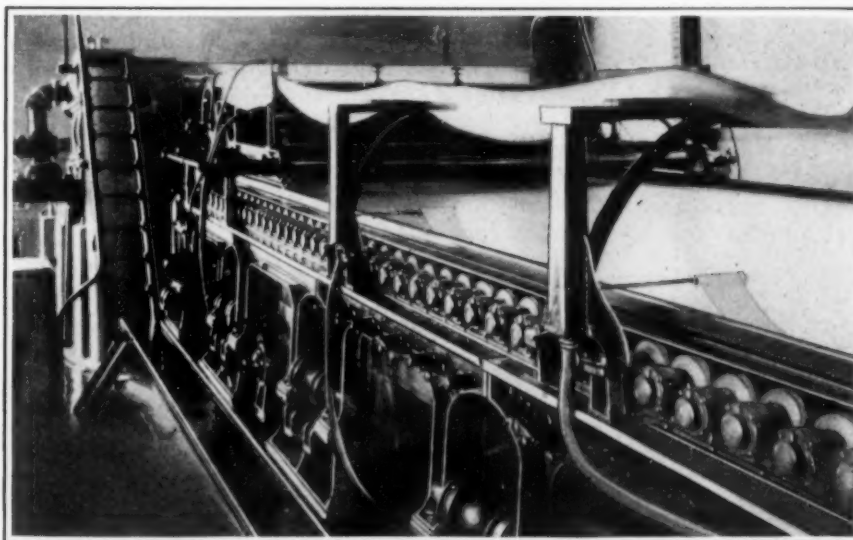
Application of Ball Bearings to a Fourdrinier Machine
